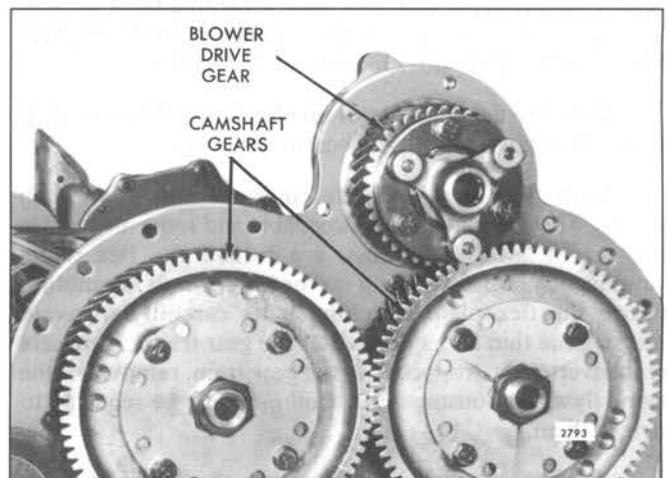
Blower Drive Gear Mounting (Turbocharged Engine)
